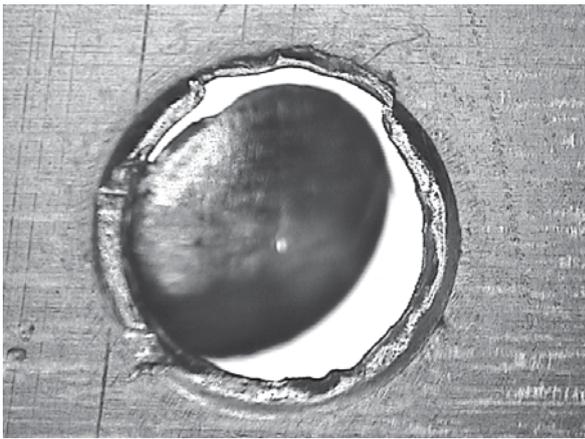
Photograph of hole exit burr, Drill A, 1st setting ($v_c = 226 \text{ m} \cdot \text{min}^{-1}$, $f = 0.190 \text{ mm}$).
